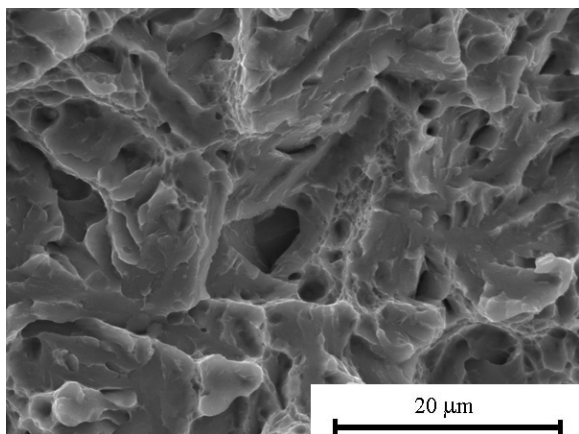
Local view of the fracture surface from Figure 8, the crowfoot points to the place of the cleavage fracture initiation
